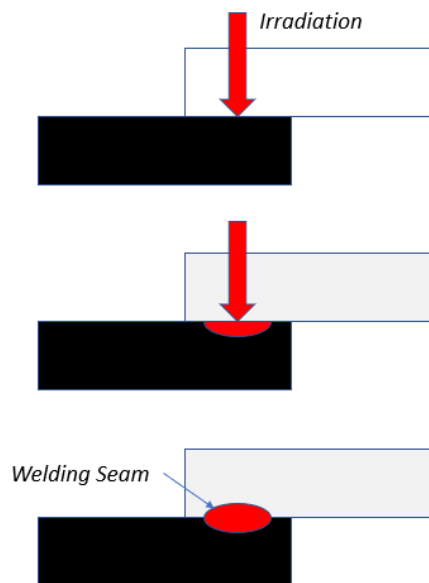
Through transmission welding phases: 1) Irradiation, 2) Heating of the absorbent material, 3) Transferring of heating in the transparent material.
